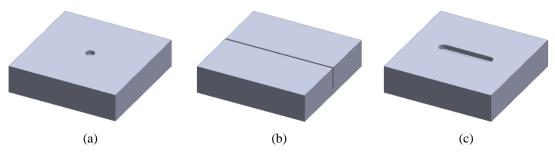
Example material removal from a (a) hole-drilling, (b) slitting, and (c) slotting measurement
